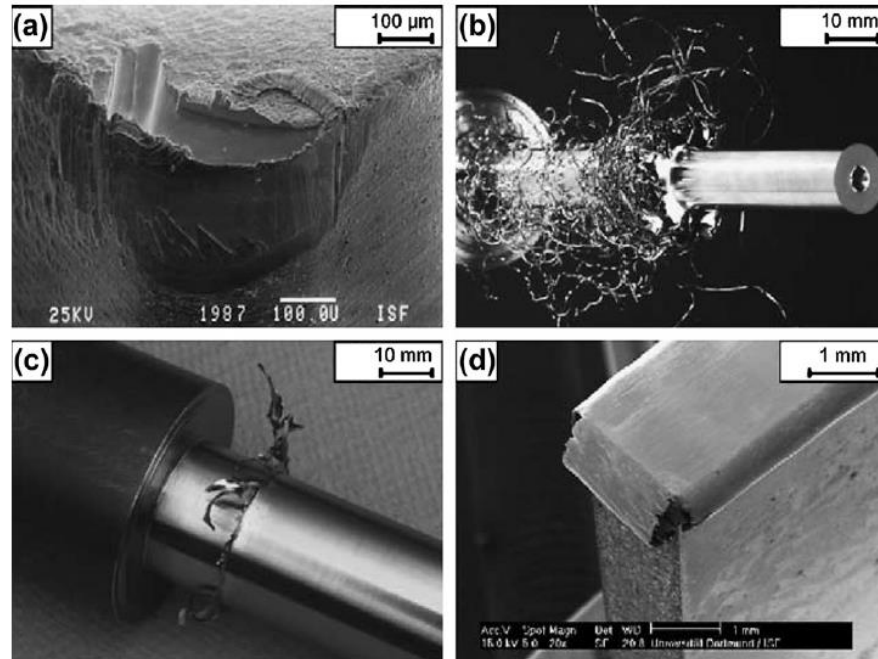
Major drawbacks in machining NiTi shape memory alloys: (a) high tool wear; (b) undesirable chip formation; (c) formation of burrs after turning (d) and grinding [48]
